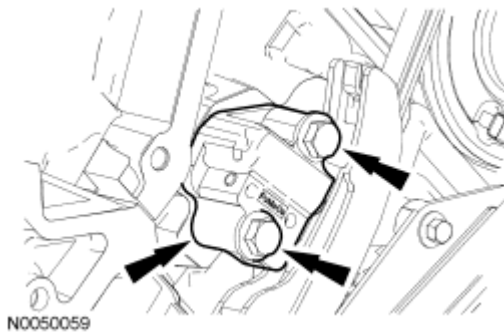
Locating LH Primary Timing Chain Tensioner Bolts
